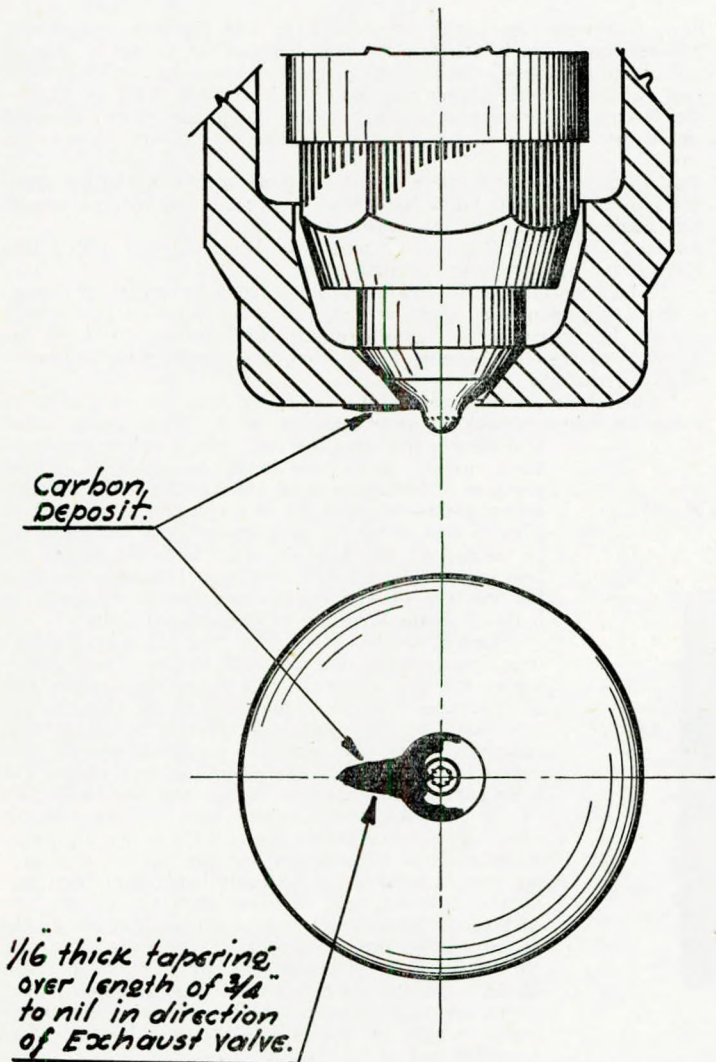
Location of deposit on fuel injection valve nozzle of experimental engine after running on Admiralty fuel oil.
